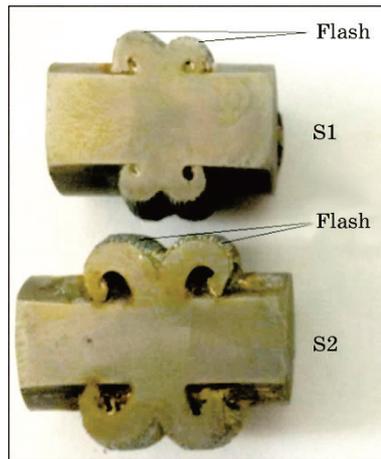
The macrograph of the weld joint interface of samples S1 and S2.
